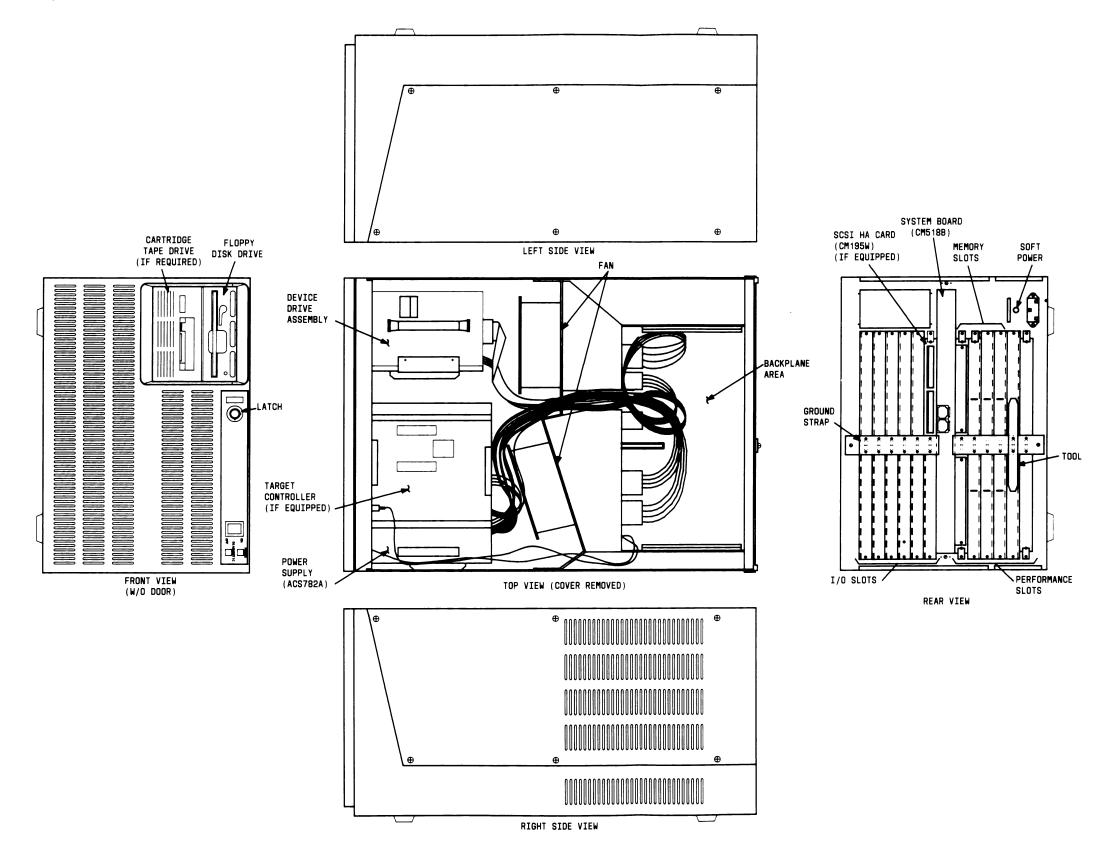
3B2/700 Computer Cabinet Assembly Drawing (ED-3T047-30)
